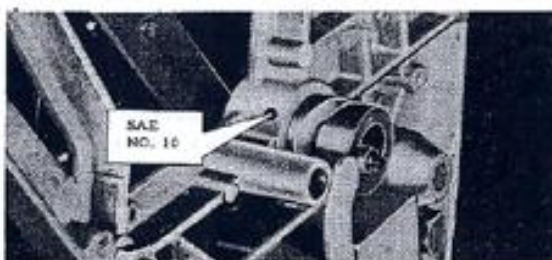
Main Cam Shaft Front Bearing Lubrication Point
